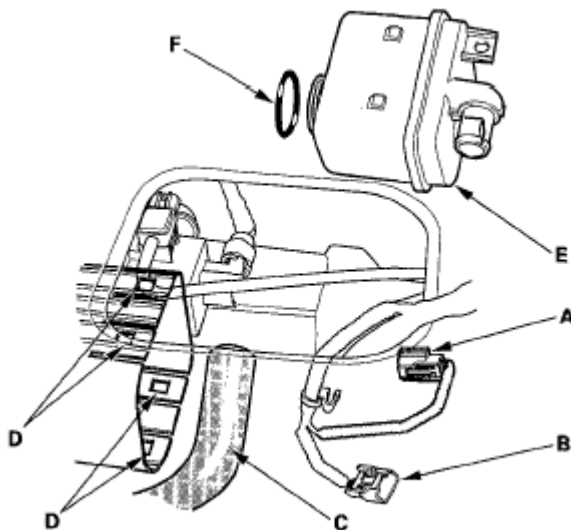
Identifying EVAP Canister Vent Shut Valve 2P Connector And FTP Sensor 3P Connector
